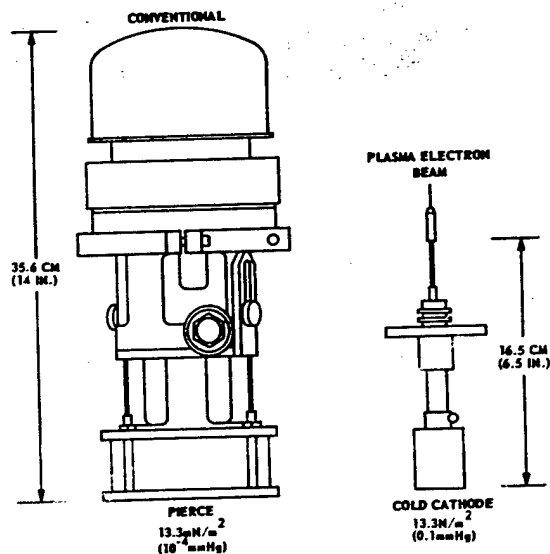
ELECTRON-BEAM WELDING DEVICES
